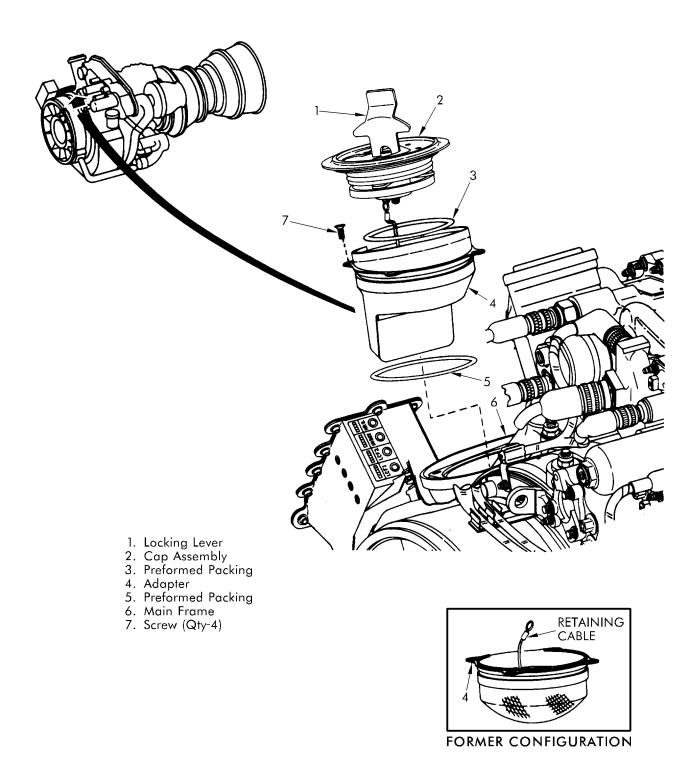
Oil Tank Cap and Adapter; Removal and Installation
